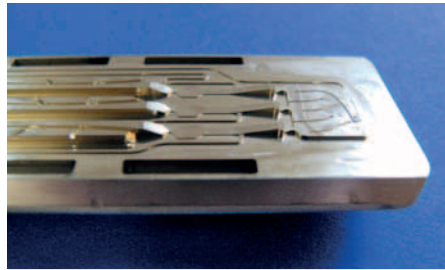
Mold insert realised using ultraprecision mechanical machining
